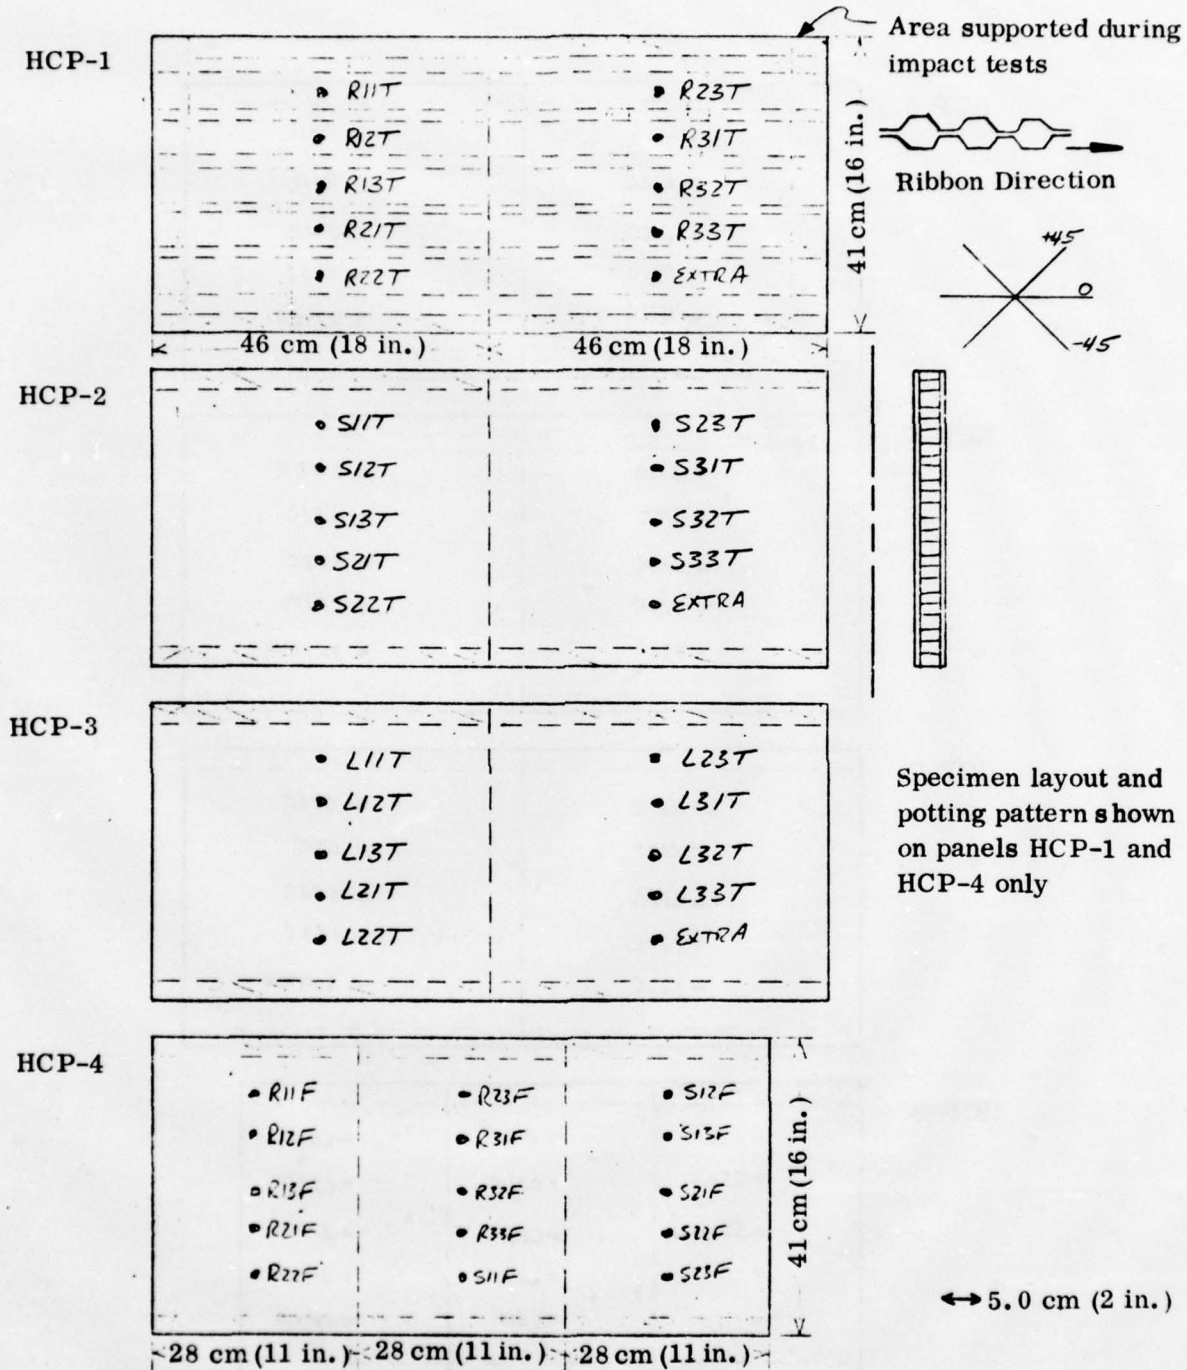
Honeycomb Impact Panels - Specimen Layout
